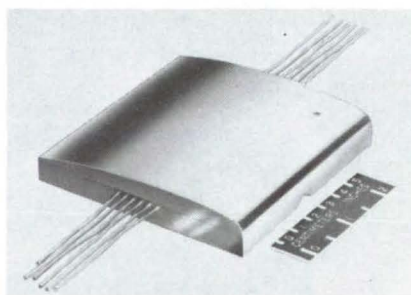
The Airfoil Has Been Machined to Contour along one surface in this view, after the plates have been brazed together. The tiny pressure-sensing orifices are too small to be visible in this photograph.
